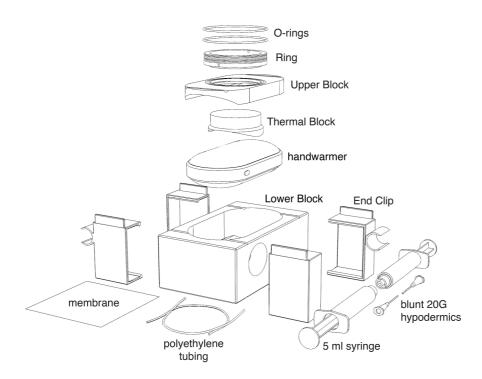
Skeeter Pheeder parts. Names of 3D-printed parts are capitalized (O-rings are not 3D-printed).
